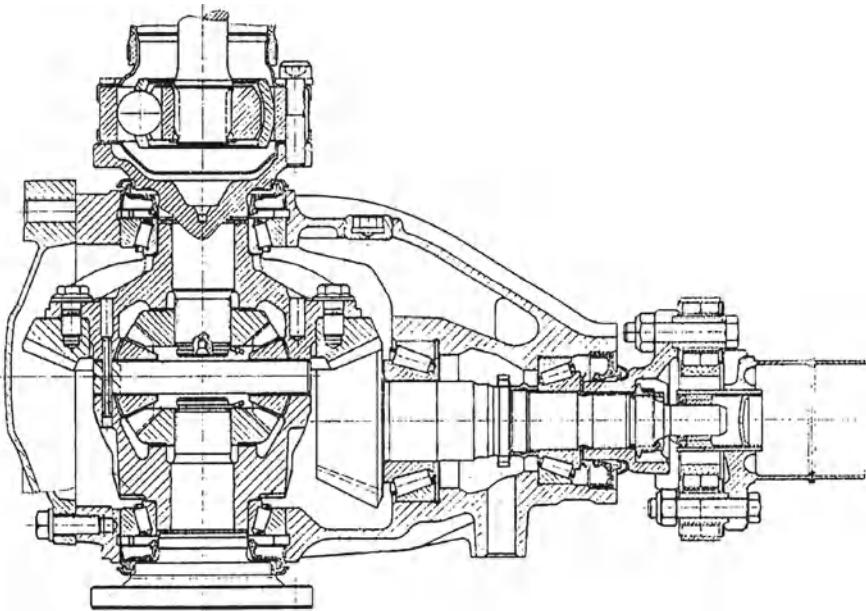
Cross section of a differential assembly for a rear-wheels drive car with rear independent suspensions (from Genta and Morello 2009)
